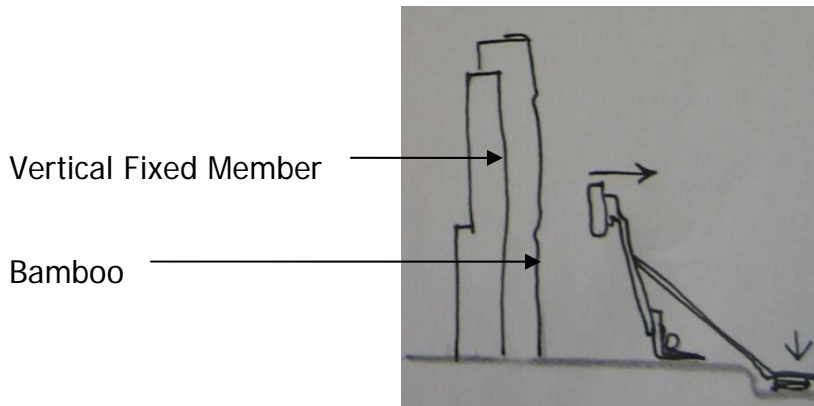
Exploring the concept of mechanical spring to hold bamboo.
